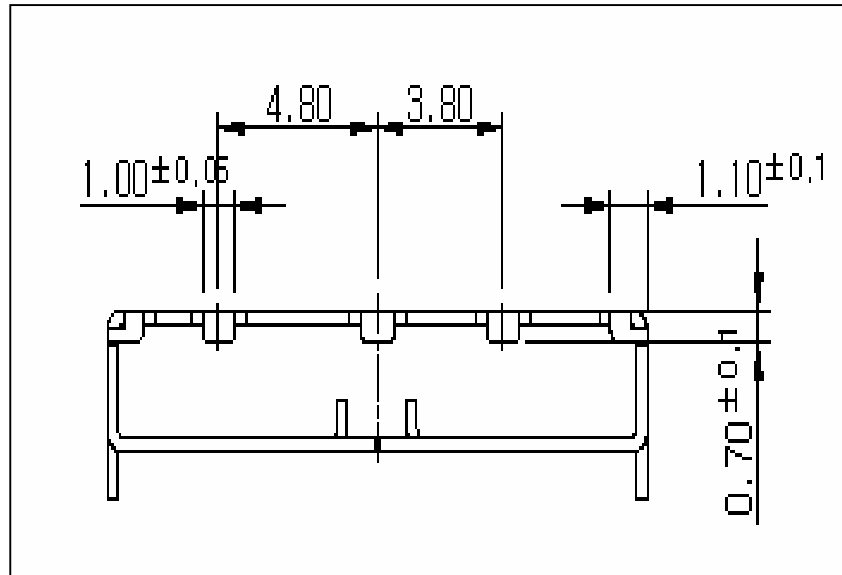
Outer Dimension of the Receptacle Selective Insert Key
